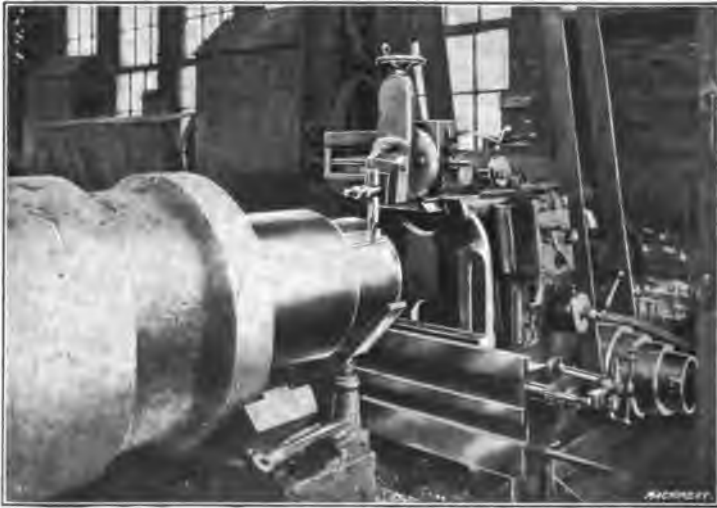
Planing End of 20-ton Steel Roll, with Shaper having Side-traversing Tool-head
